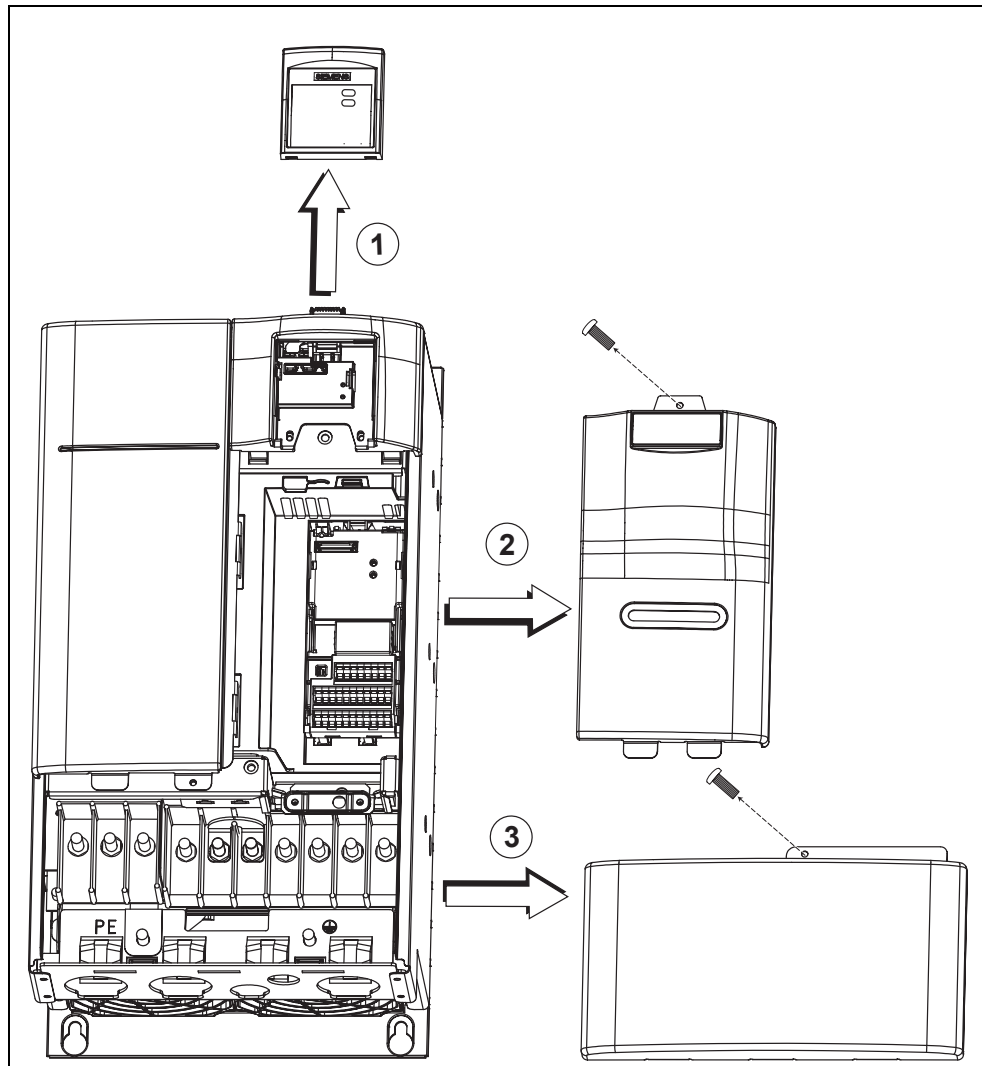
Removing front covers (Frame Sizes D and E)
